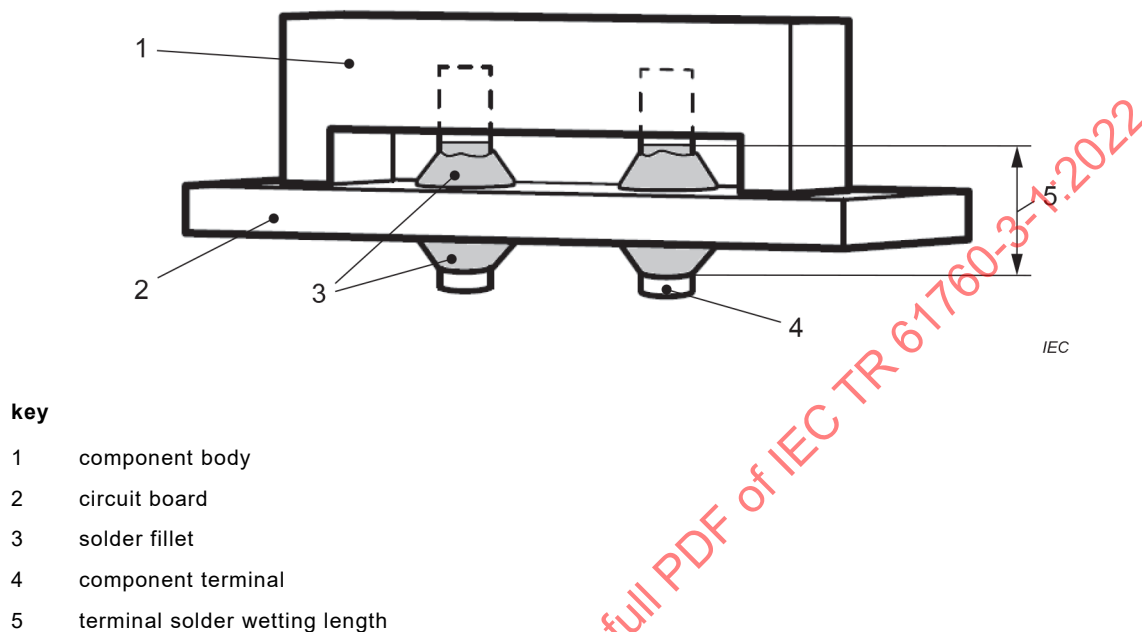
Conceptual view of solder wetting of component terminals after reflow soldering
